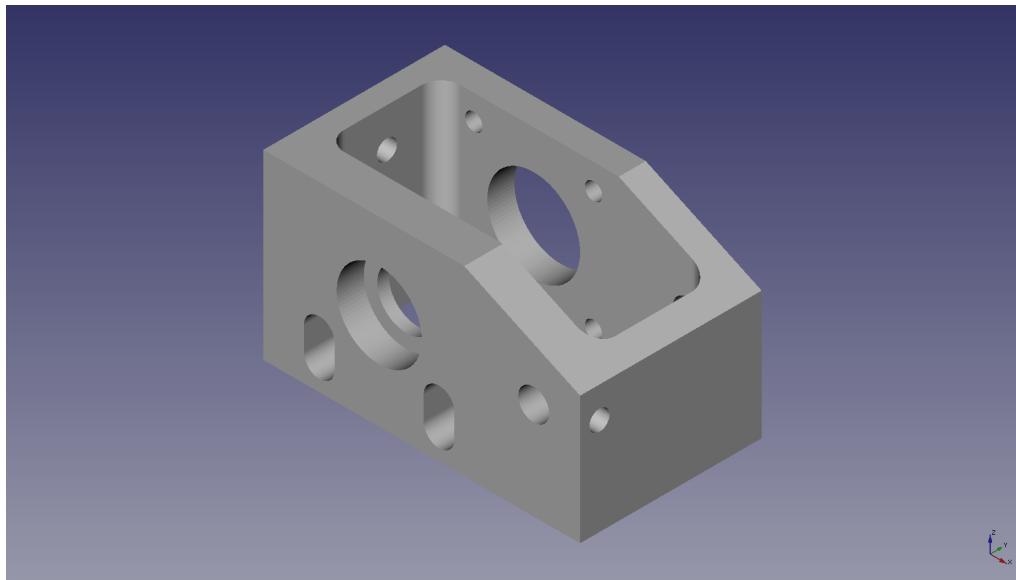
Begonia 3D Printed Lower Z Left Render
